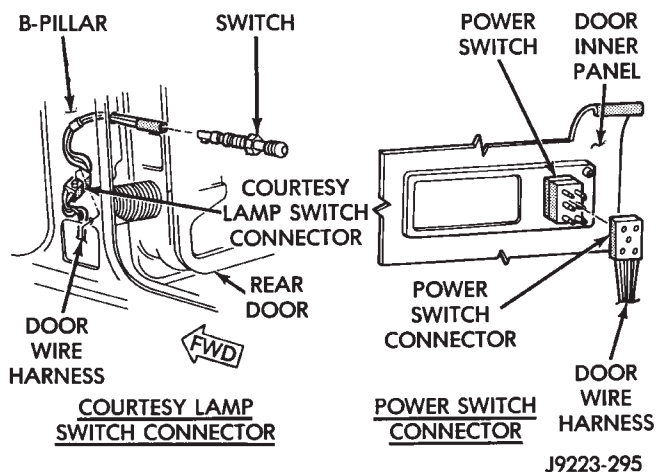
Rear Door Courtesy Lamp and Power Switch Wire Harness Connectors
